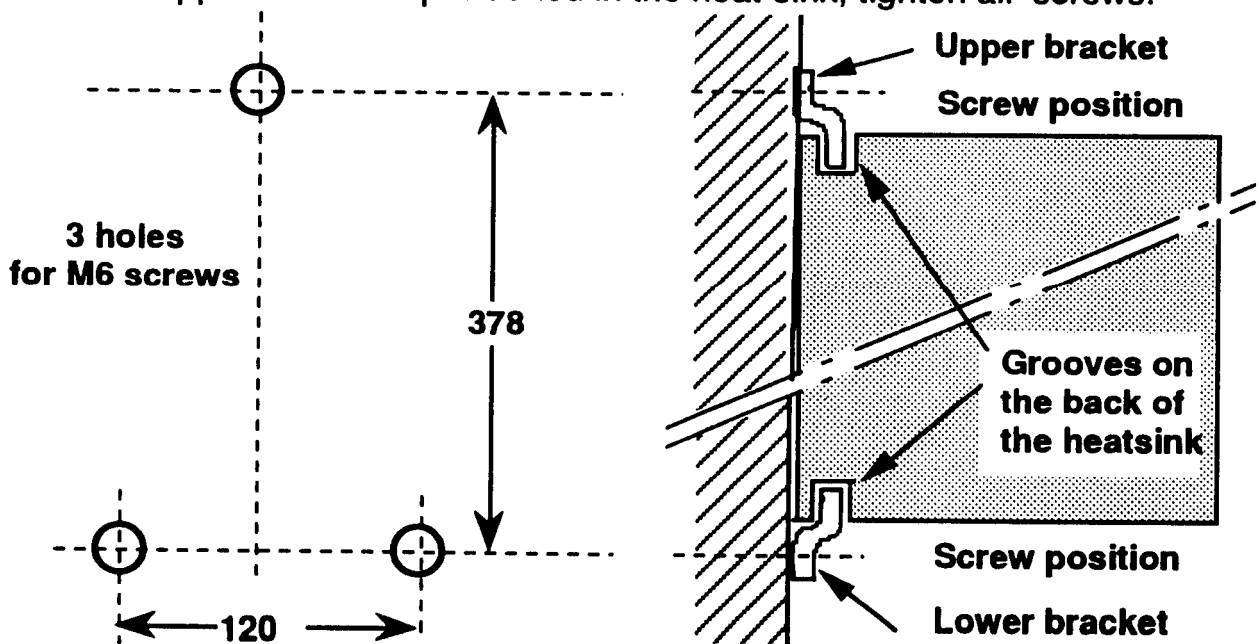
Drilling details and mounting of a convection cooled unit, bulkhead mounting
